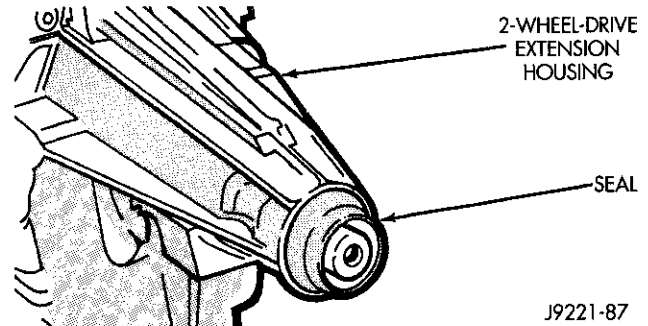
Extension Housing And Seal (2-Wheel Drive Models)
